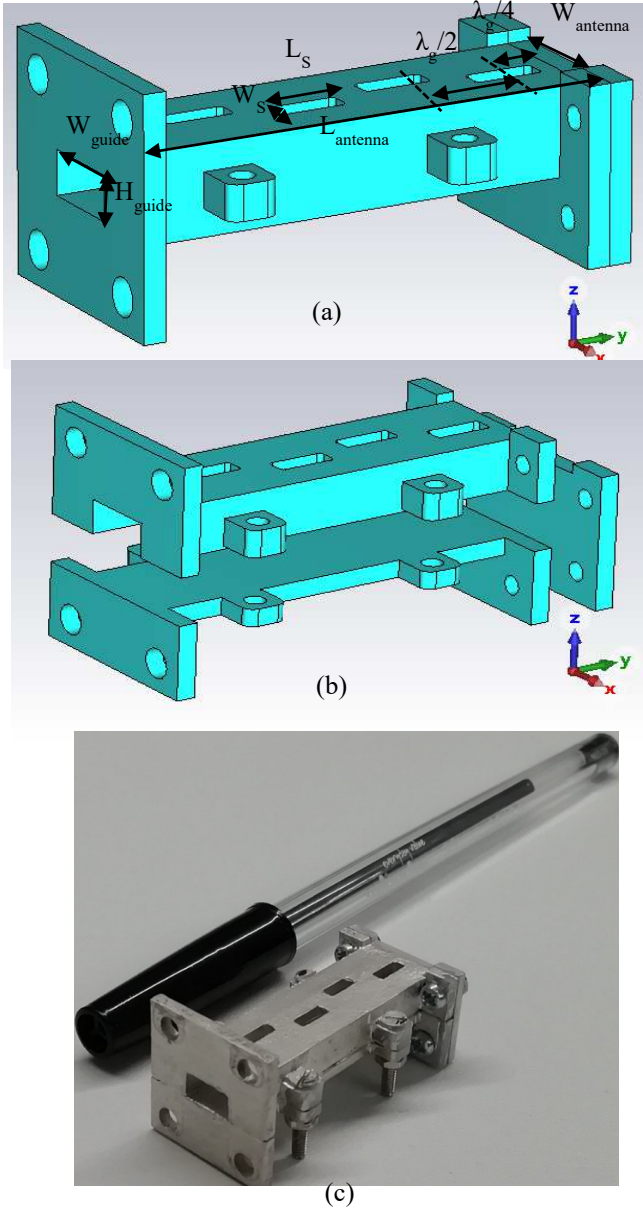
Propose 3D printed slotted waveguide linear array (a) perspective view (b) exploded view (c) 3D printed prototype
